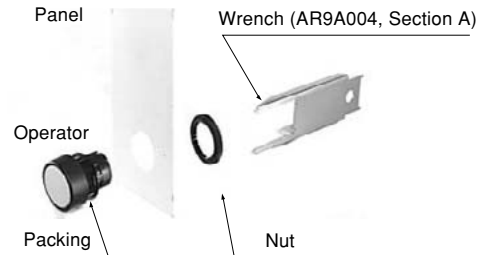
Mounting an operator in a 22.3mm-dia. hole
